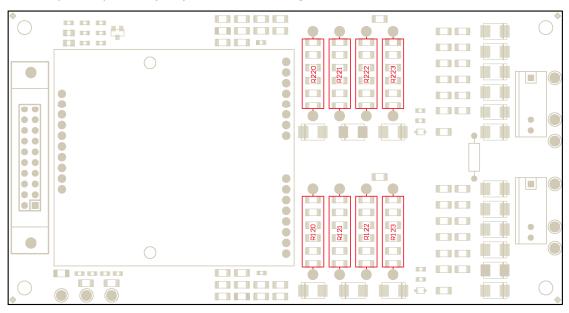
Assembly drawing of 2BB0435T with highlighted THT gate resistors Turn-on gate resistors: R120...R121, R220...R221 Turn-off gate resistors: R122...R123, R222...R223
